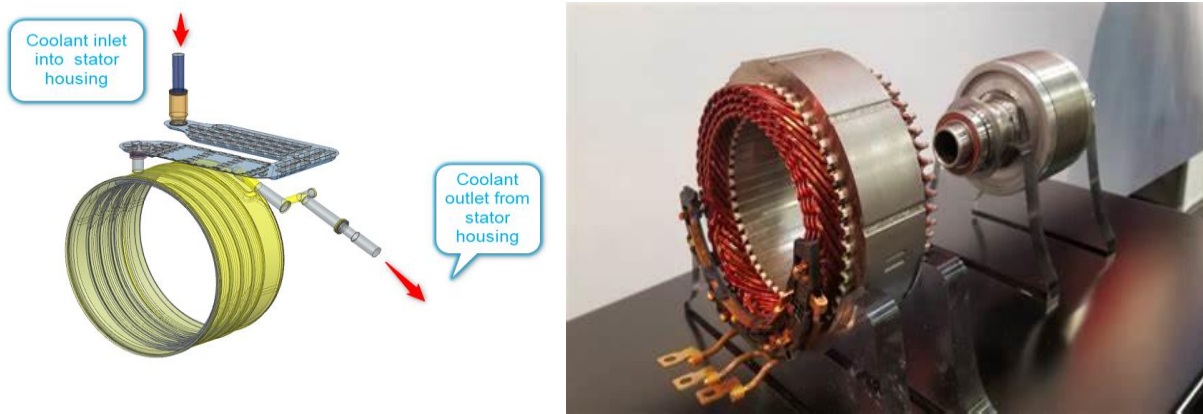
(a) Schematic diagram of coolant flow channel [Courtesy: Bosch], (b) picture showing the photograph of actual rotor and stator of the motor [21]
